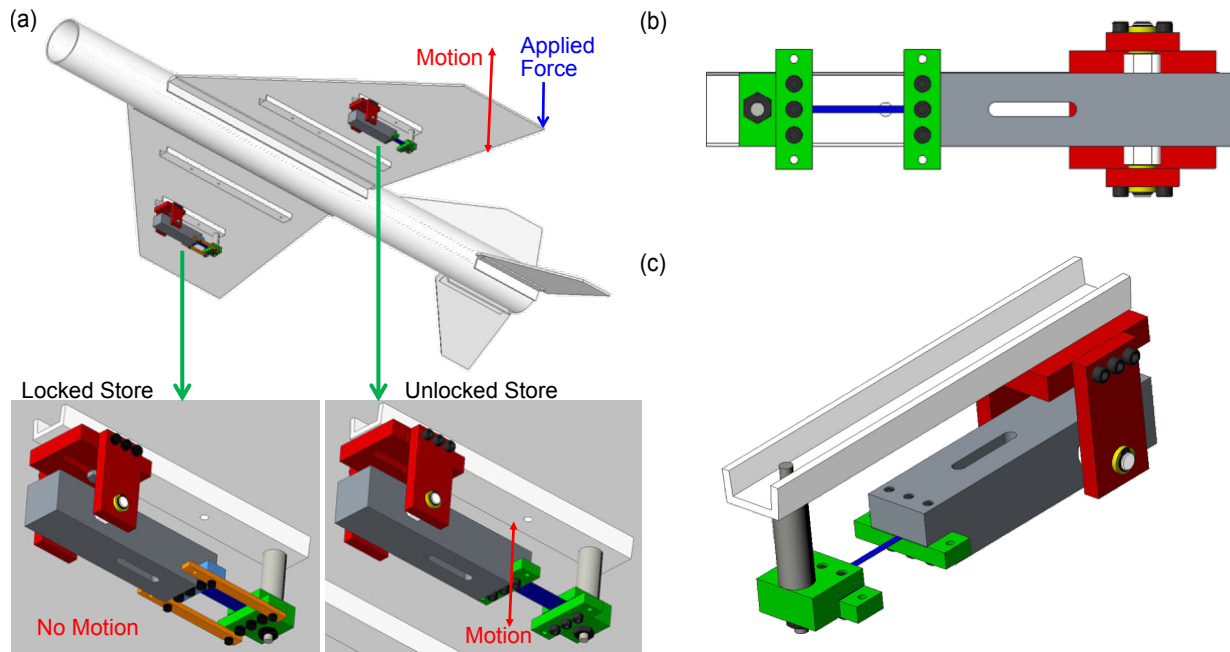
Design of the fixed-fixed flexure: (a) CAD views of model airplane with assembled stores attached and zoomed-in views of the locked and unlocked stores. (b) Bottom view of unlocked store. (c) Isometric view of unlocked store.
